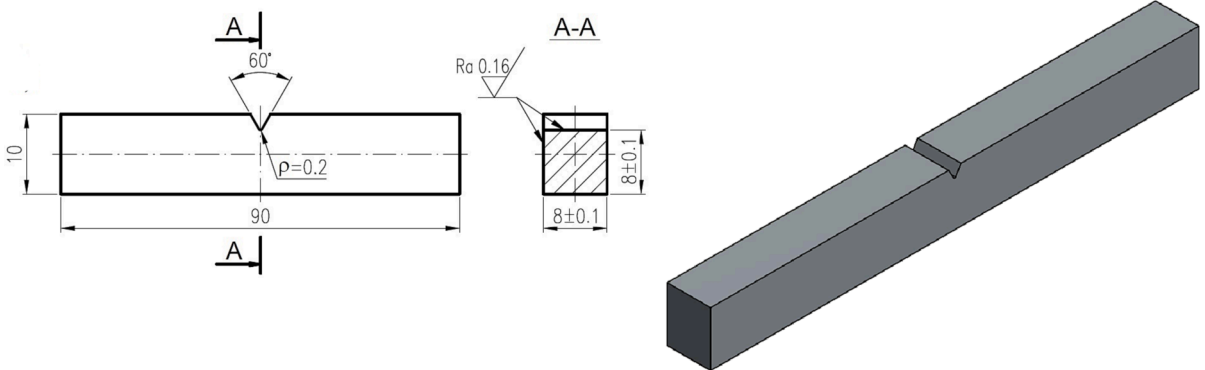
Geometry of the notched specimen (dimensions in millimeters).
